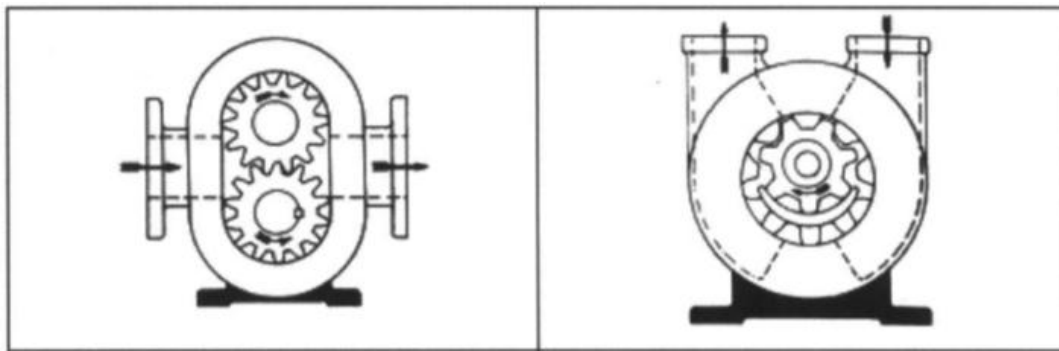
External gear pump (left) and internal gear pump (right)
